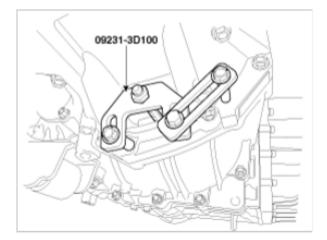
Tightening Bolts And Nuts Of Holder And Links Securely Using Tool (09231-3D100) Courtesy of HYUNDAI MOTOR AMERICA
